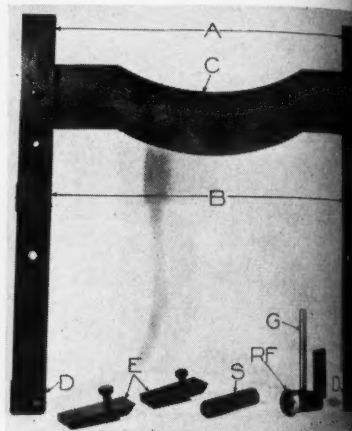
Parts for Planer Contour-Cutting Attachment.
